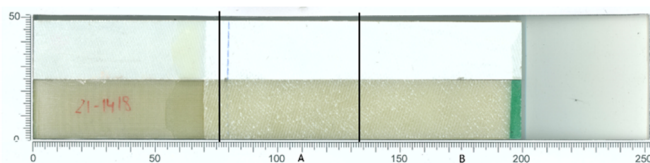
Example of a fracture surface after testing with an AM PC/PC DCB specimen (specimen number 21-1418).
